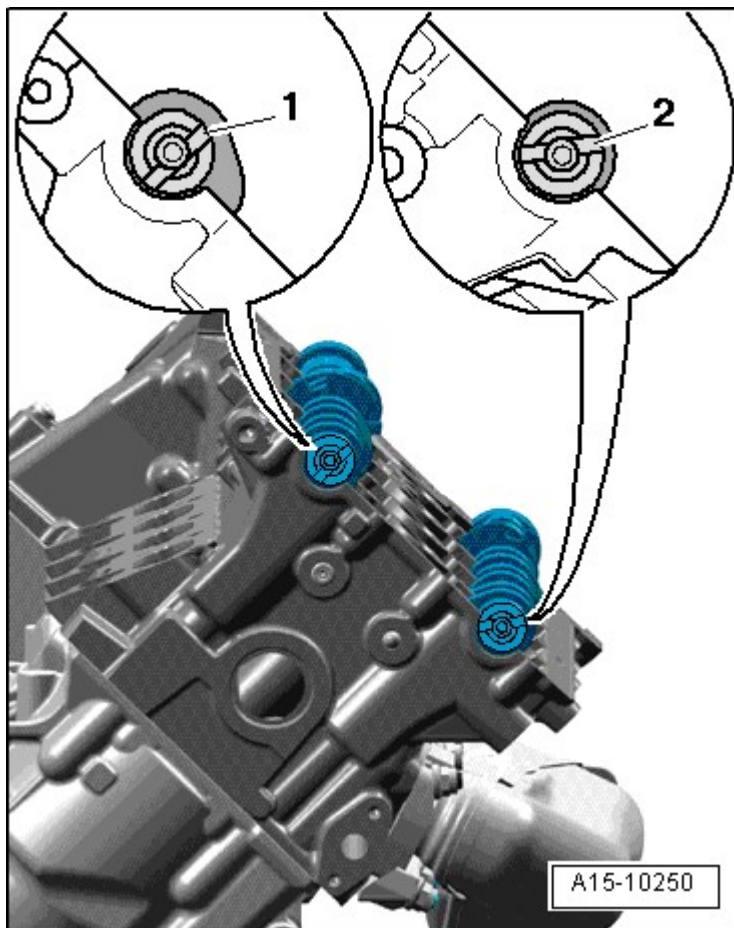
Identifying Intake Camshaft & Exhaust Camshaft (Left Cylinder Head)
